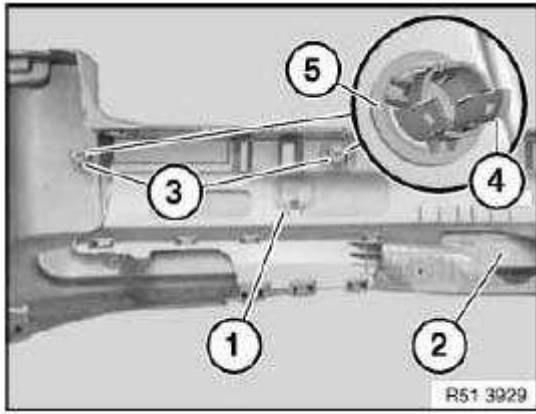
Cover Cap, Towing Hitch, Locators And Spacer Rings
